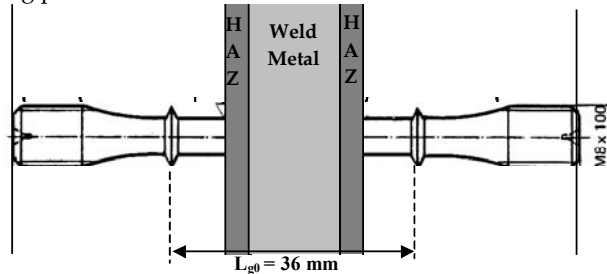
Specimen location in the WJT91 weldment
